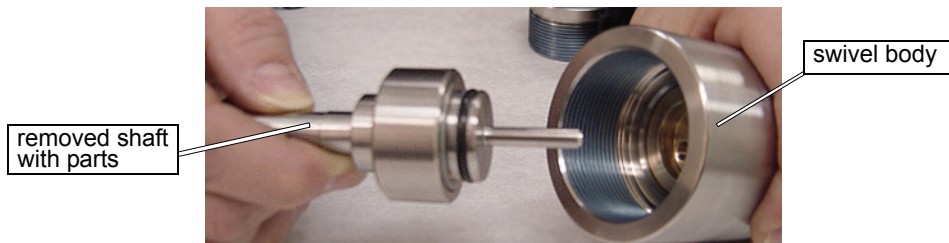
Remove the Shaft and Attached Parts from the Swivel Body
